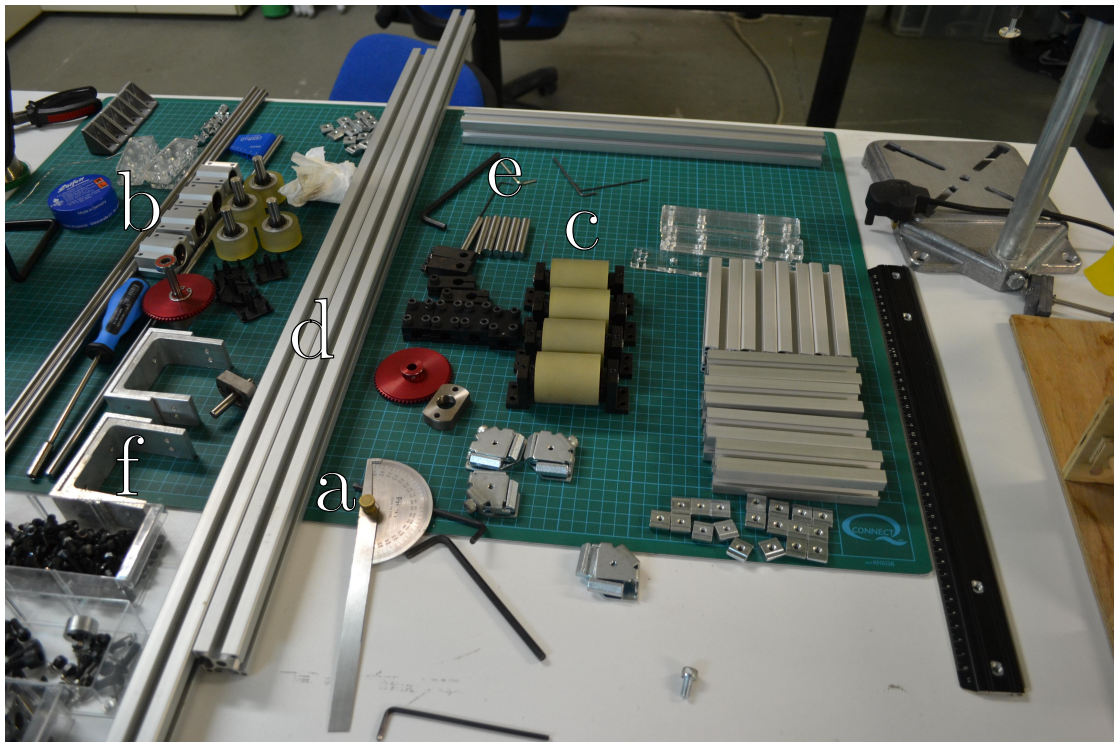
The TC and EEP disassembled on the workbench. In this image, one can see: (a) the primary struts, (b) linear bearings, (c) large and small rollers, (d) chain drive sprockets, (e) steel axles and shafts and (f) aluminium mounts
